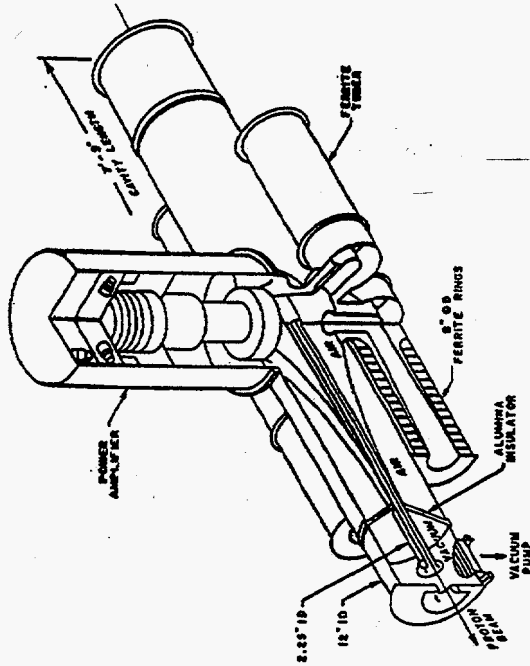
Cut-Away Drawing of RF Cavity. (Ref. 5)
